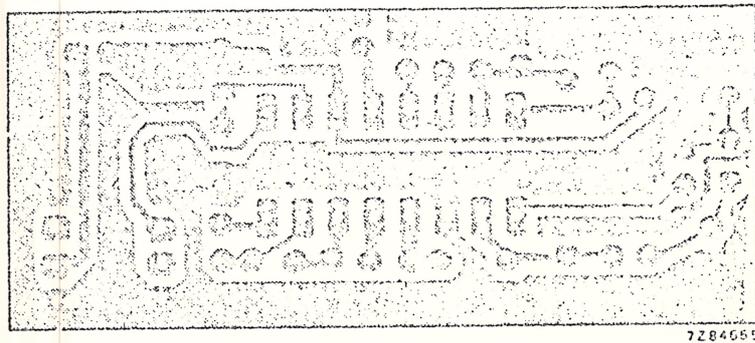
Track side of printed-circuit board used for the circuit of Fig. 7; p.c. board dimensions 53 mm x 23 mm.
